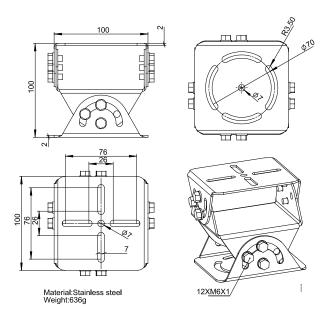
Bracket Dimensions (P/N: RSAN100N)
